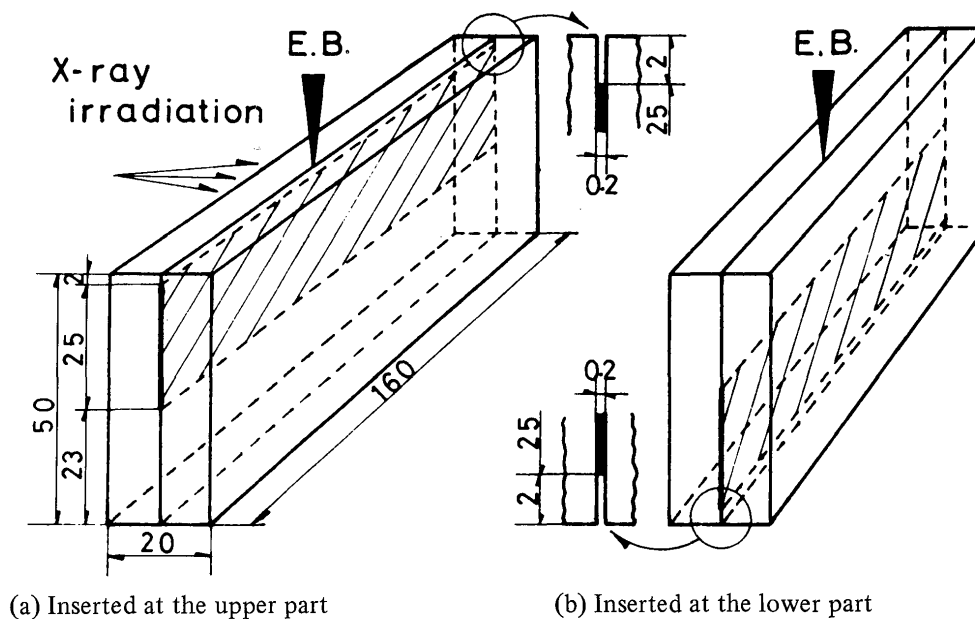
Dimension of specimens and position of inserted foils (Series 2)
